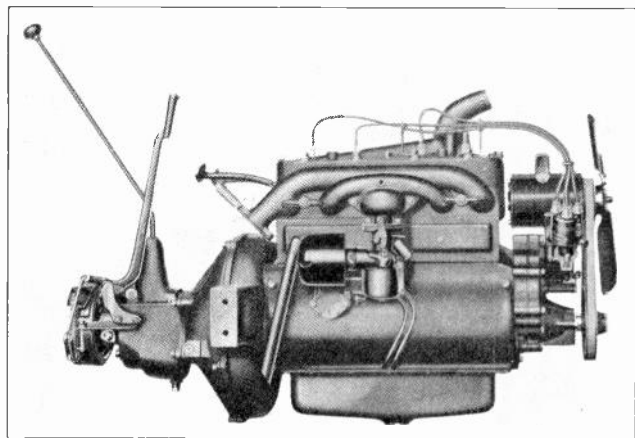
Side view of a four-cylinder automobile engine used by the Chrysler Plymouth automobile. Note the position of the carburetor, intake and exhaust manifolds and spark plugs.
